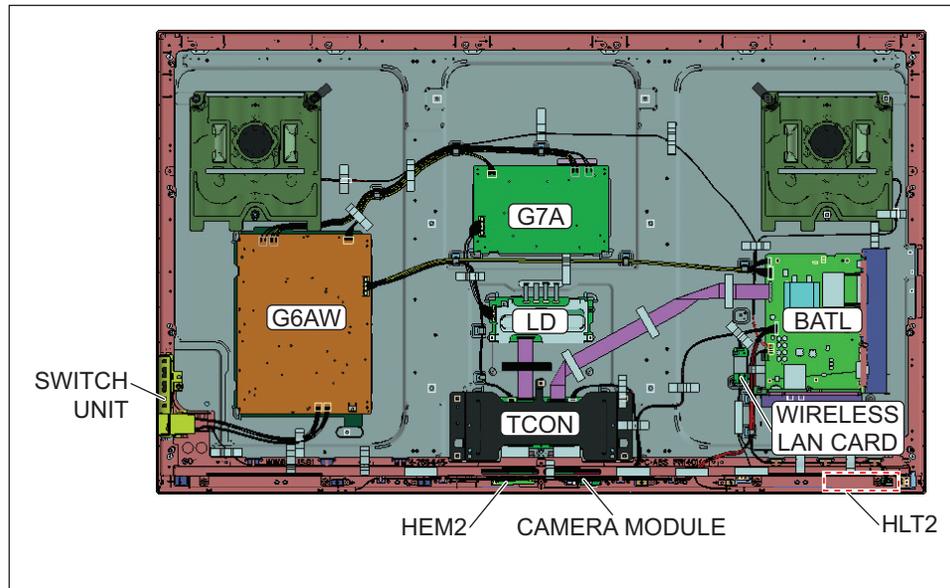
BOARD LAYOUT FOR KDL-60NX720 ONLY
